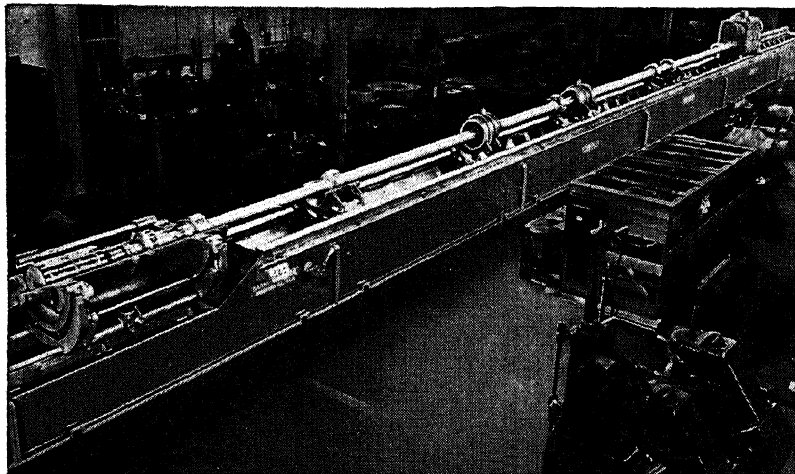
Spindle stroke honing machine, 76 ft. stroke, 30" bore said to be the longest machine of its type. Main bed is of arc welded steel construction.
